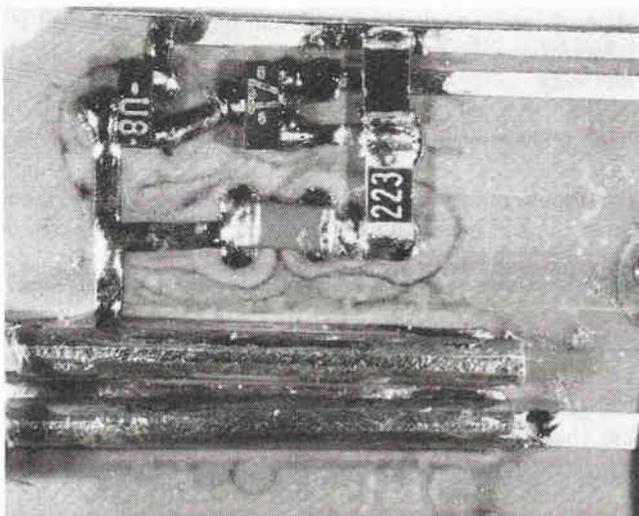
THIS CLOSE-UP SHOWS how really small the components are. The transistor, labeled U8, is actually smaller than the resistor and capacitor chips. The two "giant" horizontal tubes near the bottom are the LED socket.
